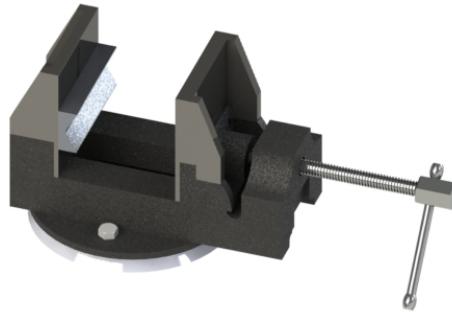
SolidWorks rendering of the Rotating Plates, Vice, and Jaw of the Fixturing Mechanism
